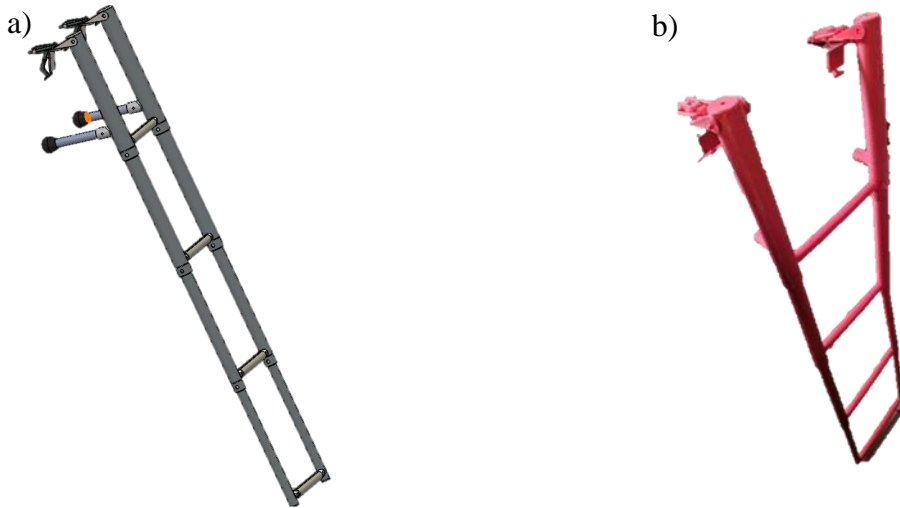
a) 3D design of the prototype b) prototype using 3D printing
